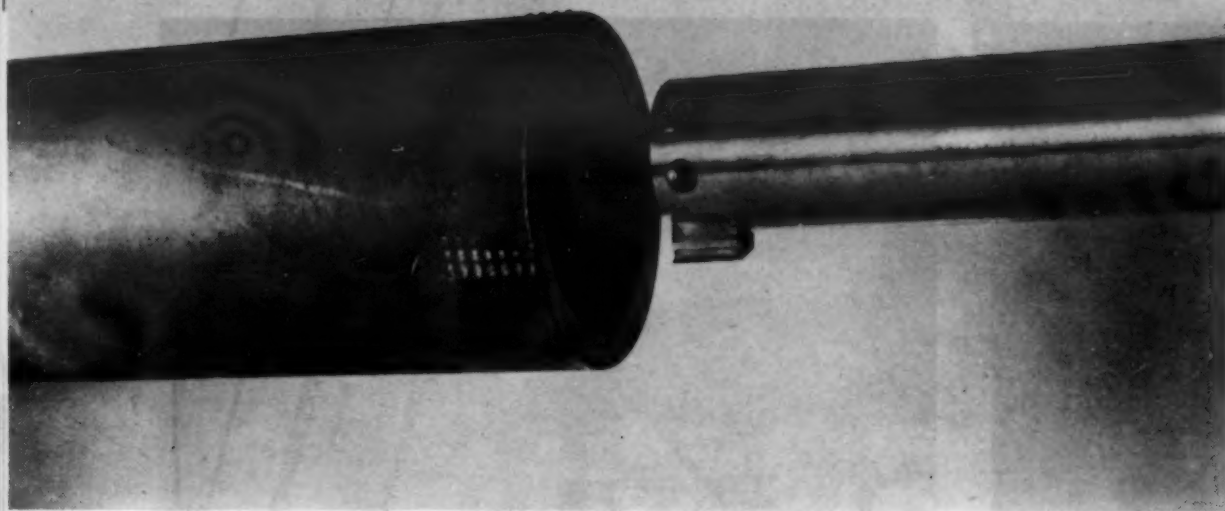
Boring tool used to remove sample from weld for microscopic examination.
